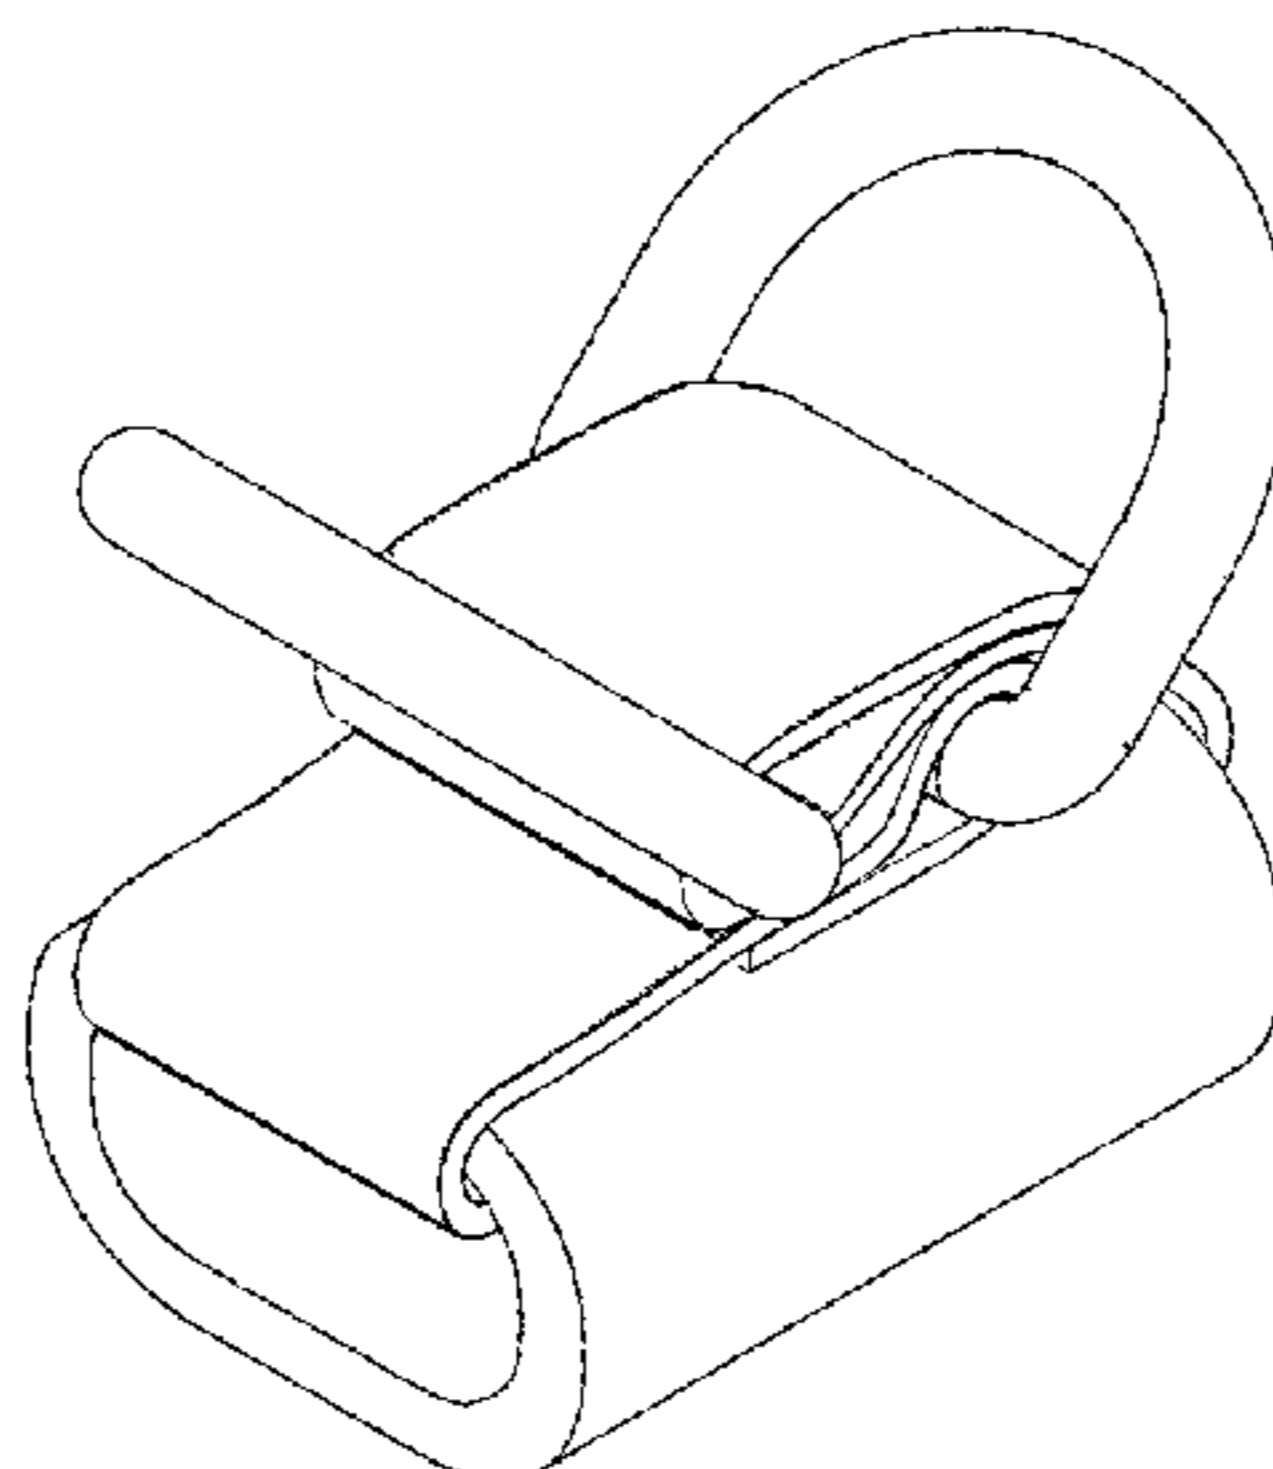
is a front view of the lanyard attachment assembly of FIG. 1.
